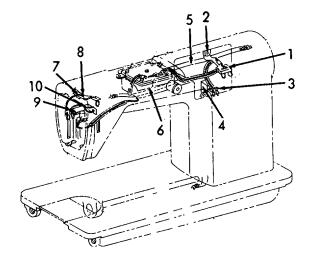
Upper (Arm) Lubricating Oil System, Installation.
